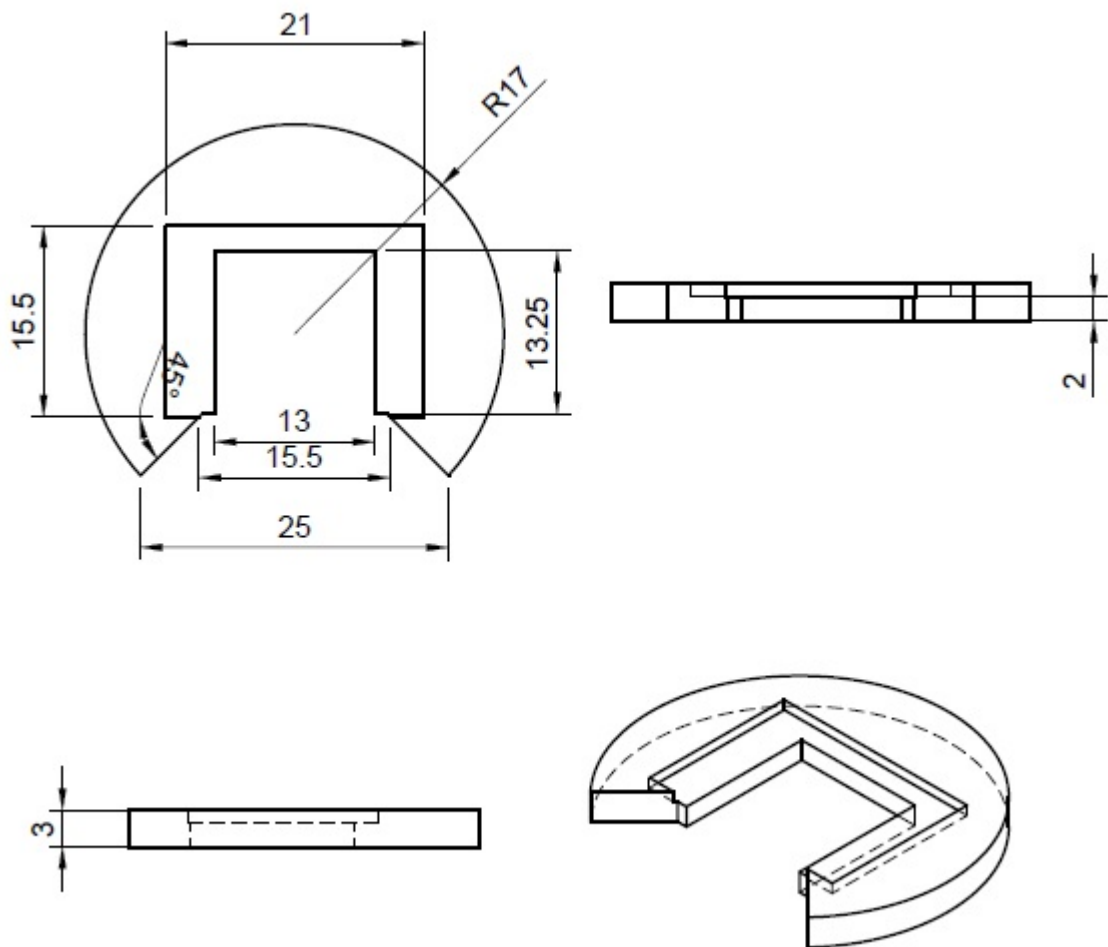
The drawing of a sample holder. It is a 3mm thick and 34mm in diameter disc with a spacing at the middle to fit the flag type sample holder. The material used to make this holder is 316 stainless steel.
